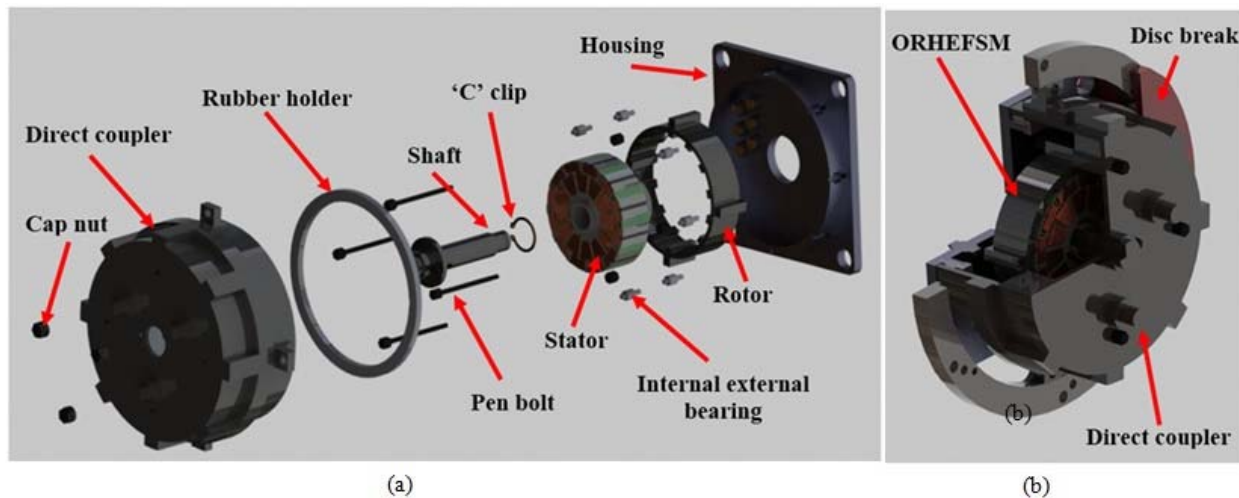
(a) Assembly process D-Drive structure. (b) Internal section view complete assembly process D-Drive structure.
